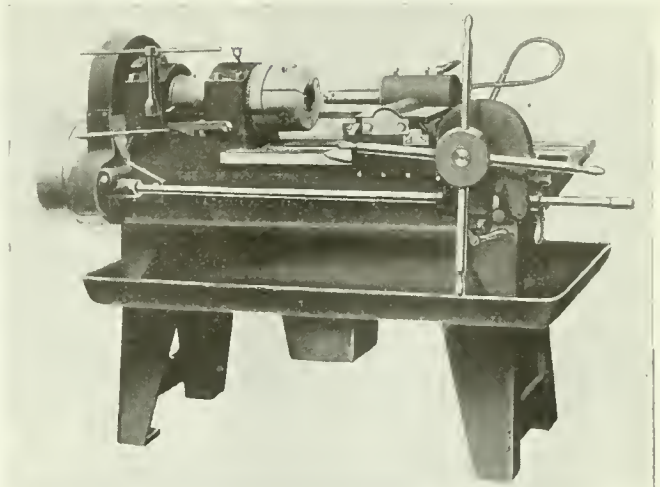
SHELL BORING MACHINE WHICH CAN BE ARRANGED FOR TAPER WORK.
